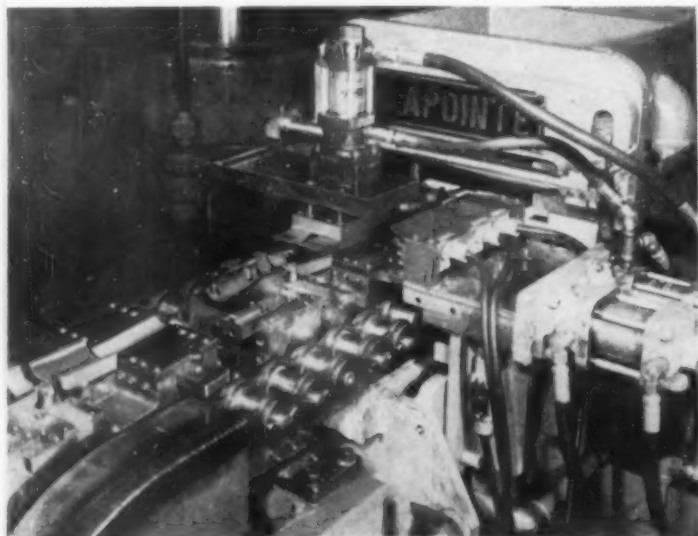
Loading end of continuous machine for broaching connecting rods. Twenty fixtures hold workpieces by pneumatic seating clamps.
